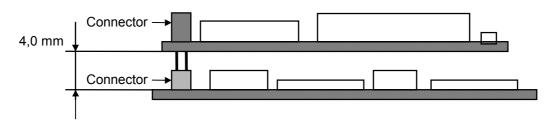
Components fitted on target PCB below HW 86012. Distance between PCBs depend on component heights (here: 4,0 mm)
